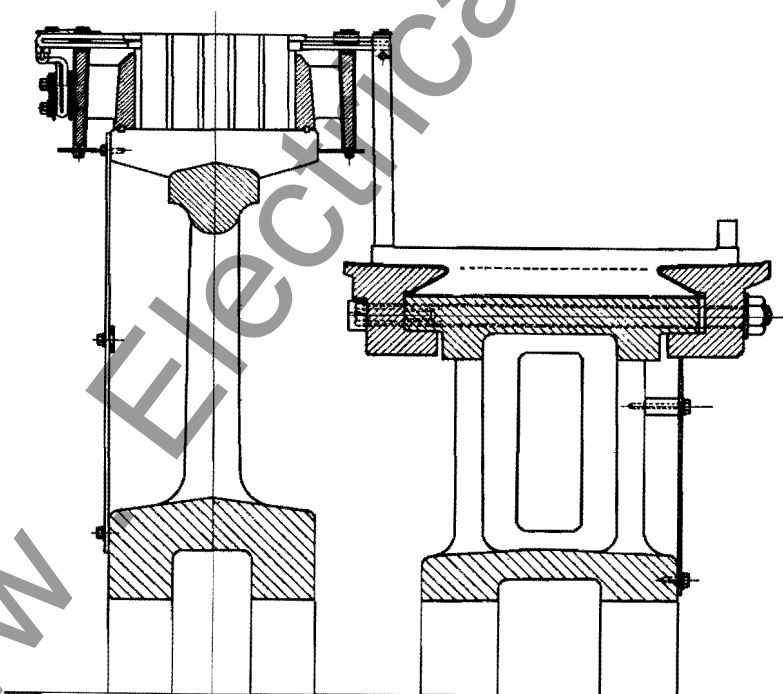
SECTION OF COMMUTATOR SHOWING LATEST TYPE OF THROUGH BOLT CONSTRUCTION
